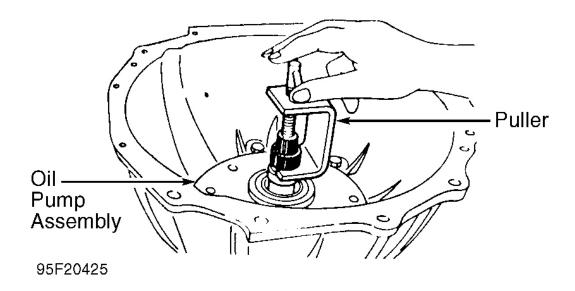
Removing Oil Pump Assembly Courtesy of ISUZU MOTOR CO.
